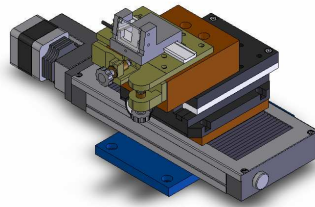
Detail of the 3D CAD design view of phase mask sub-assembly.
